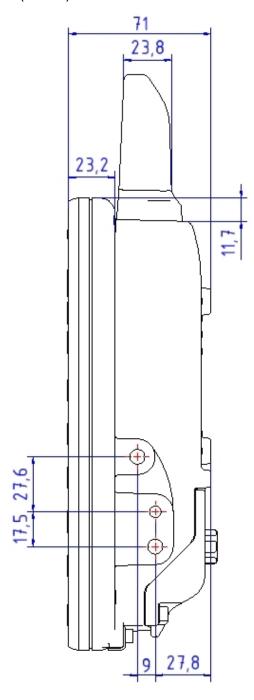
Dimensions DLoG XMT 5/7 side view
